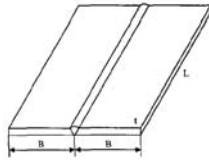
Experiment model of multi-pass butt welding model with v-groove
